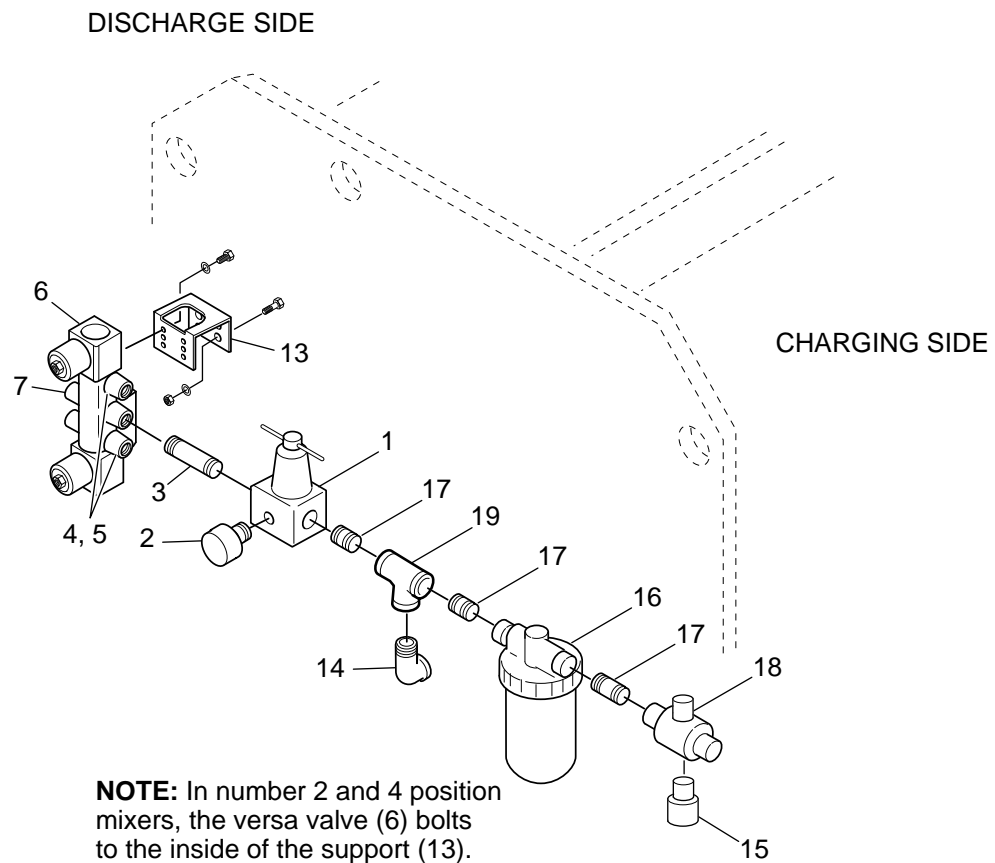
Valve Assembly – Solenoid with Lockout Valve – Gate (#467493)
